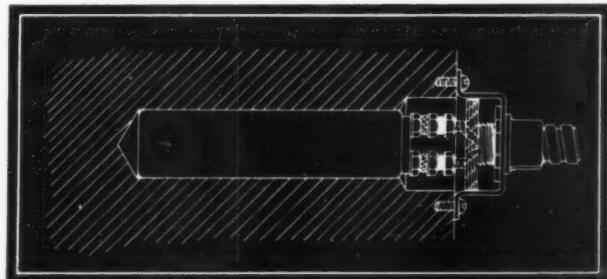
A drilled hole that has been countersunk to provide clearance for bolt terminals is used in installation
